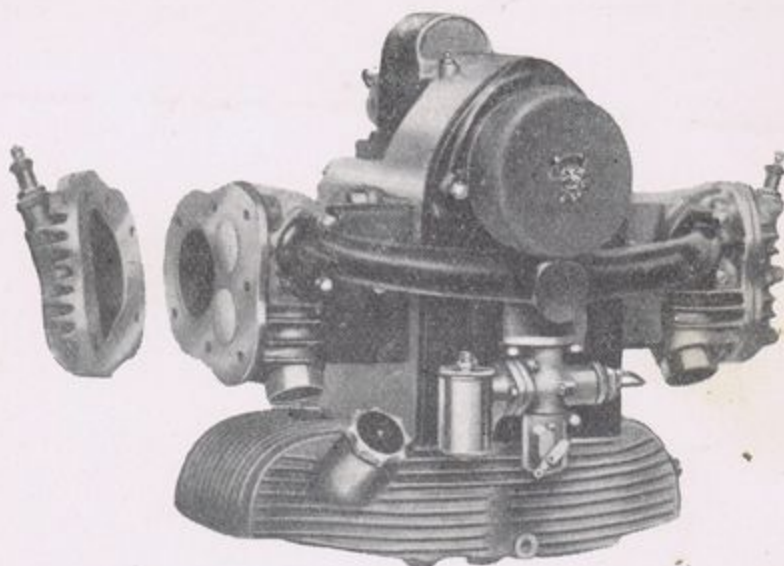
GENERAL VIEW OF 500 AND 600 C.C. ENGINE
